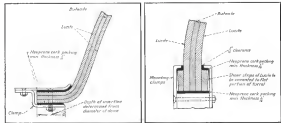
Left, double flange type of dome mounting. Fig. 20. Right, double shear strip type of mount for corrugated and hemispherical glass structures. This type must replace that shown in Fig. 18.
